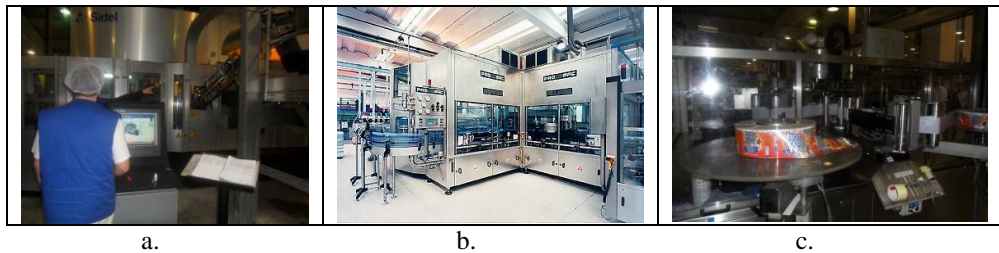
Processing machines a) Blow molder, b) Bottle filler, c) Labeler
